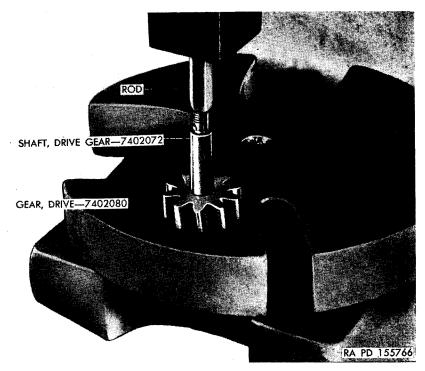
Pressing oil-pump-drive-gear shaft into drive gear.
